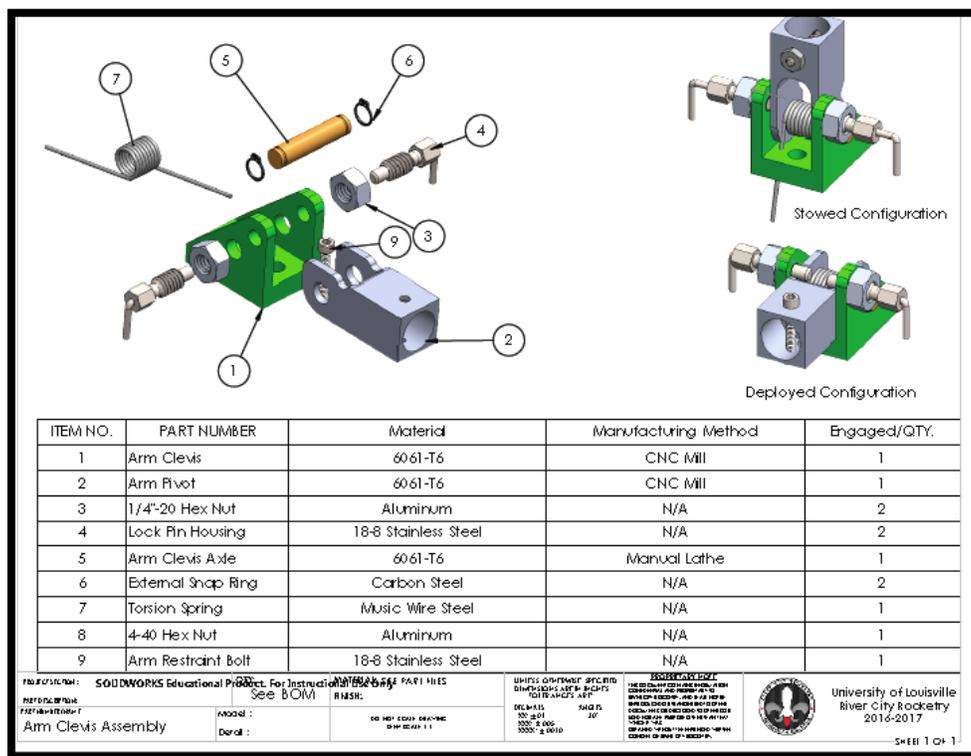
Detailed drawing and exploded view of the Arm Pivot Assembly.
